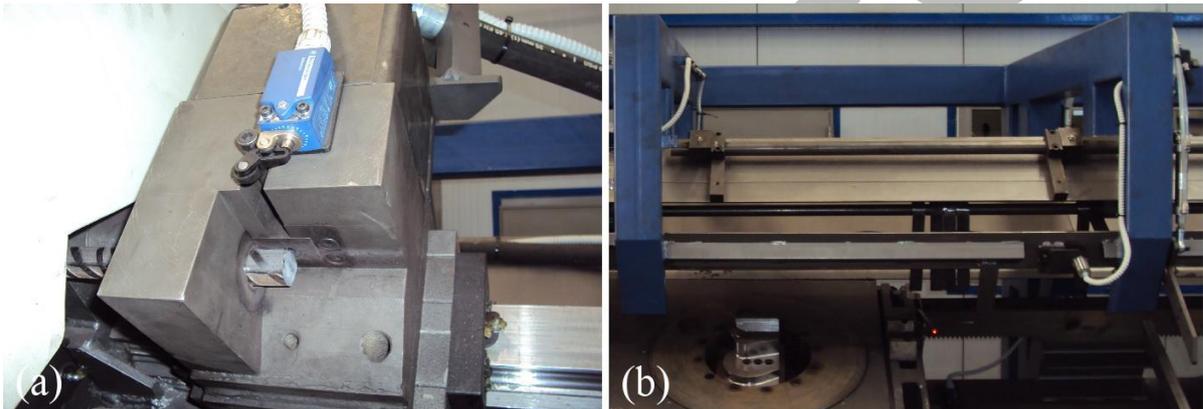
Machine detail; (a) Cutting die placed at the exit of the alignment chamber, (b) Forming die.
